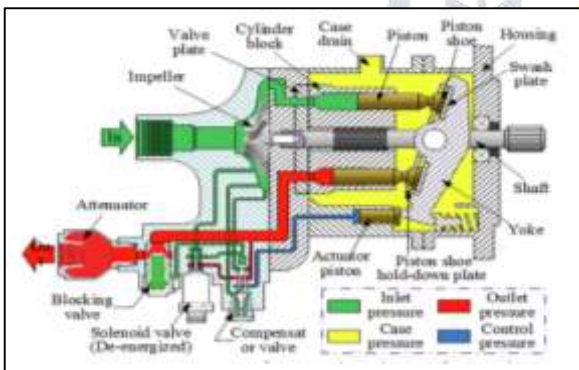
Cross-section view of a typical civil aircraft hydraulic pump [14]
